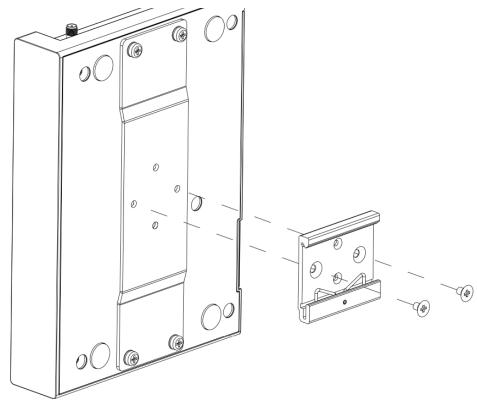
Attaching the DIN Rail Bracket for Vertical Installation of IG21R or IG31R
